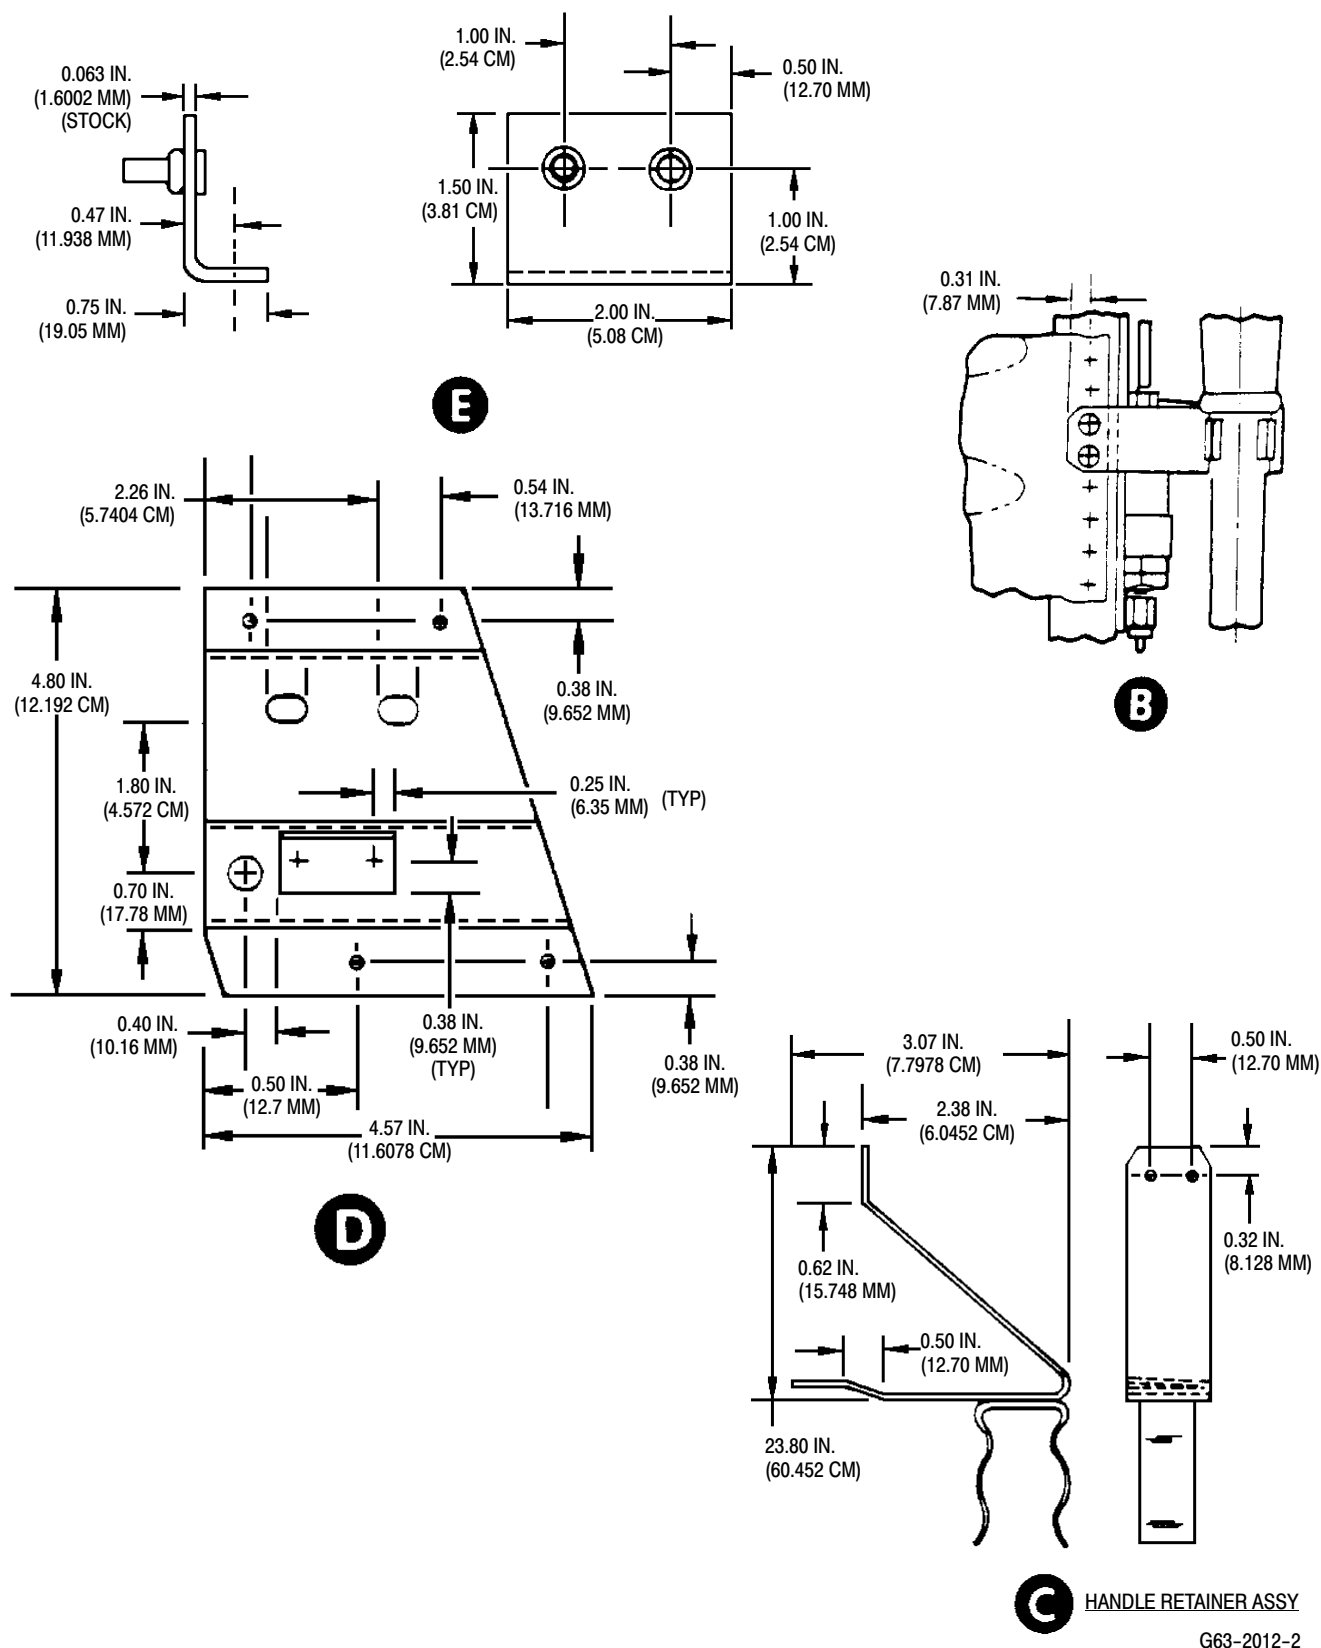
Locating Permanently Installed Components (Sheet 2 of 2)
